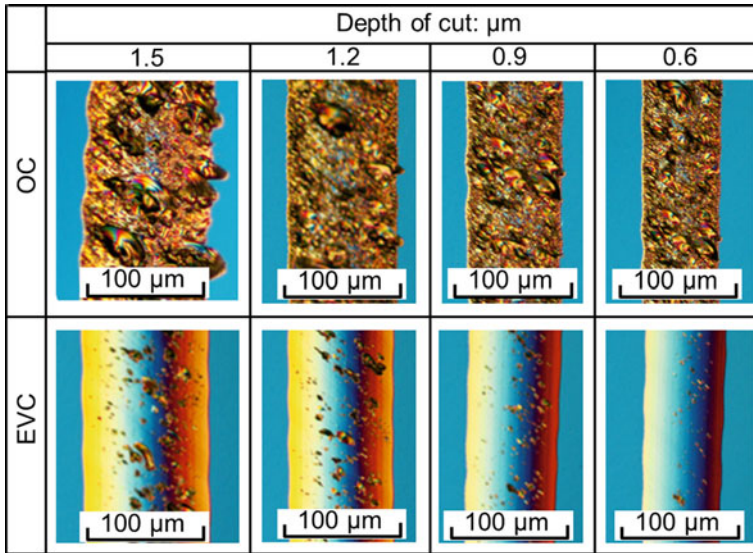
Grooves formed by OC and EVC in brittle cutting with different depth of cut [65]
